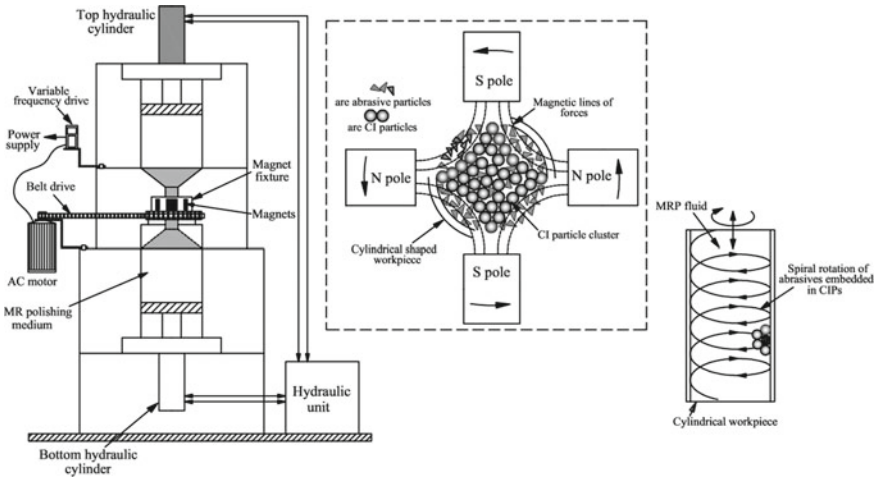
Rotational MRAFF setup with enlarged view of finishing mechanism
